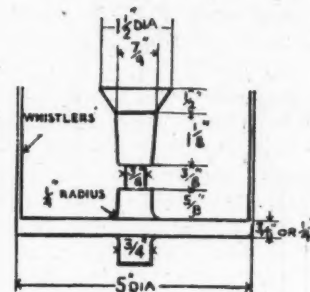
G—Pressure-disk casting. Restricted feeding into boss.
